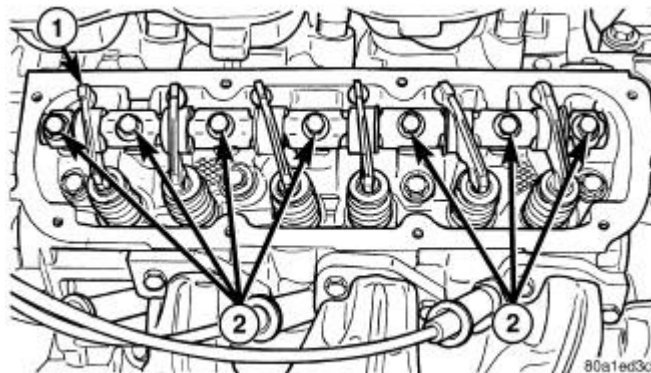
Rocker Arms, Shaft Assembly & Bolts
